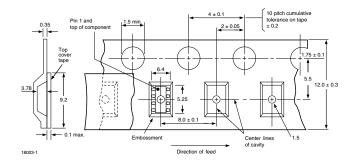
Tape Dimensions, 2000 Parts per Reel
